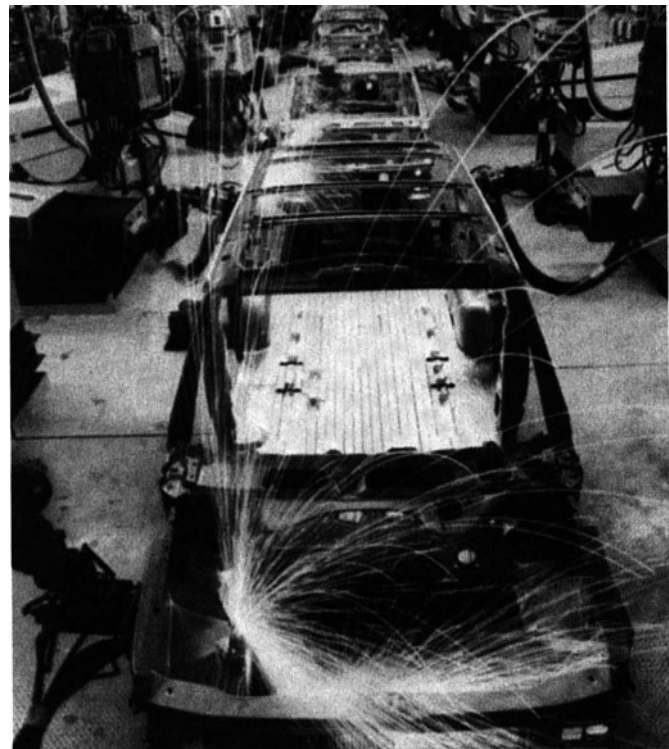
Automatic welding line where the work (unitized car body parts, such as side aperture panels, roof panels, flat floor pan, and fenders) is brought to computer-controlled robots by way of conveyor line. (*Chrysler Corporation, Windsor, Ontario Assembly Plant.*)
